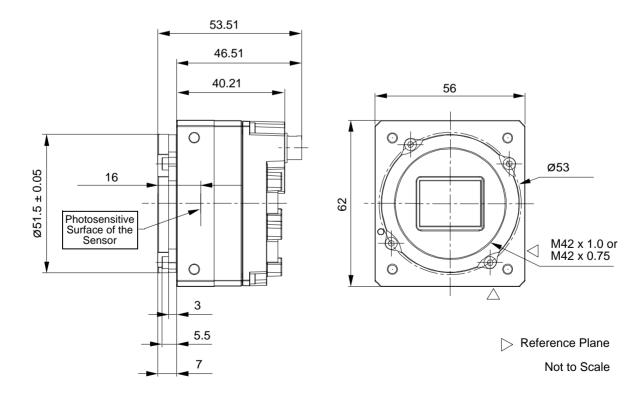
M42 x 1.0 or M42 x 0.75 Mount Adapter on a Basler beat Camera Link Camera; Dimensions in mm
